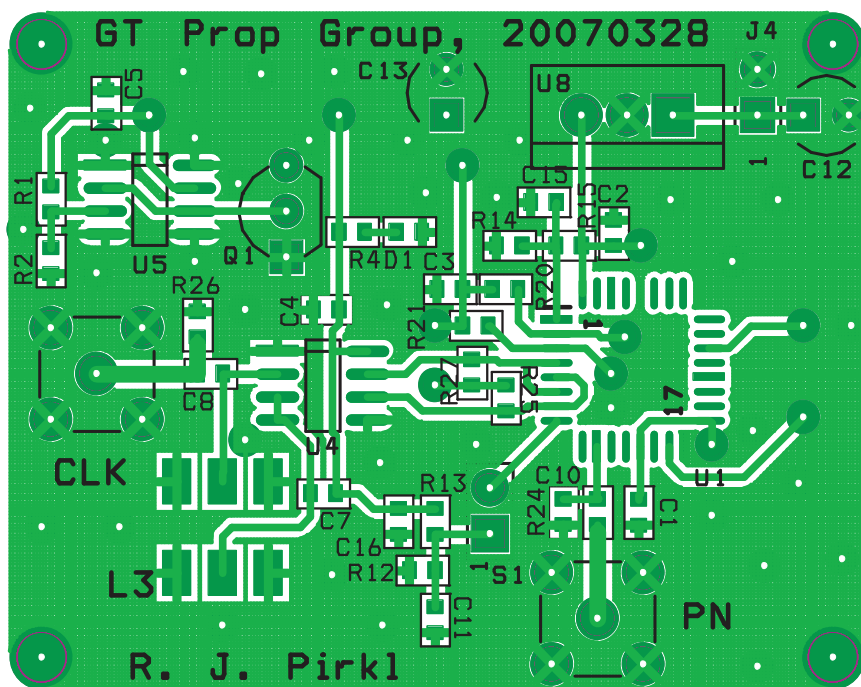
The PN generator board's top copper layer, solder mask, and silk screen.
